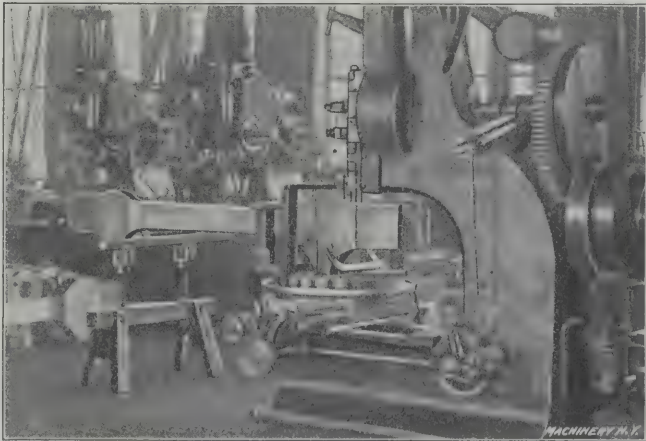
Finishing the Sides of the Tongue for the Knuckle-joint on the Intermediate Rod in the Slotting Machine
